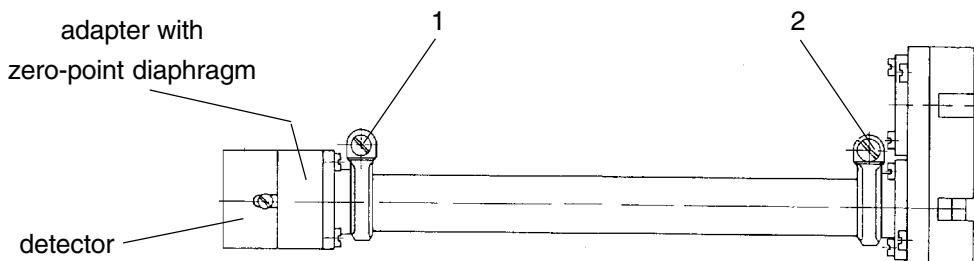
Photometer Assembly (30 mm to 200 mm analysis cells)
